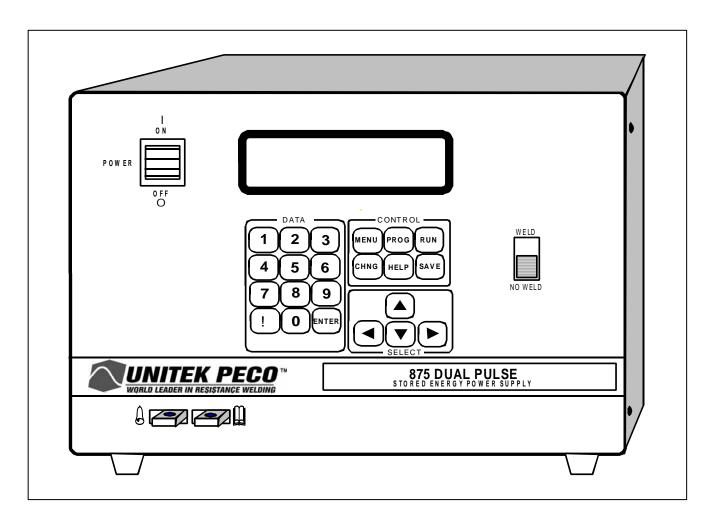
875DP Dual Pulse Resistance Welding Power Supply
